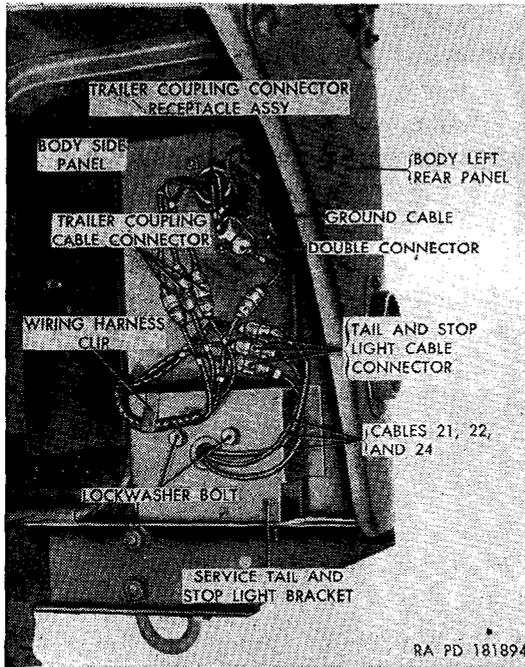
Trailer coupling electrical connector receptacle and service tail and stop light assemblies (M38A1)—disconnect points in wheel house—guard removed.
